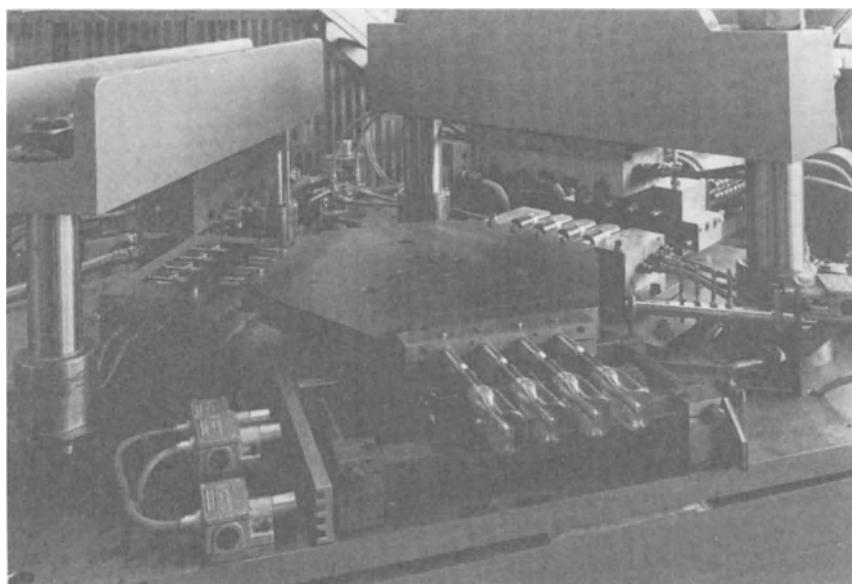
View of three-station IBMM; in rear right are injection preform molds, in rear left are blow molds, and in front is the stripper plate for removing containers.
